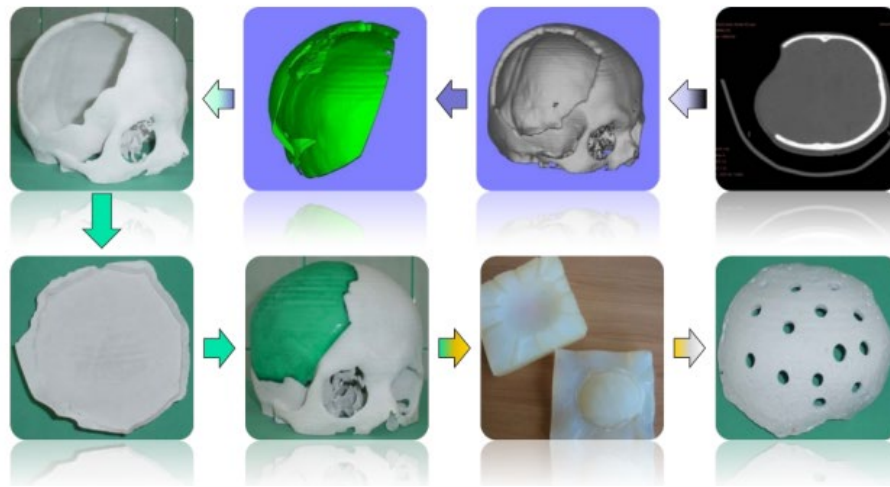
Required steps for obtaining a customized implant by Selective Laser Sintering and Vacuum Casting technologies
